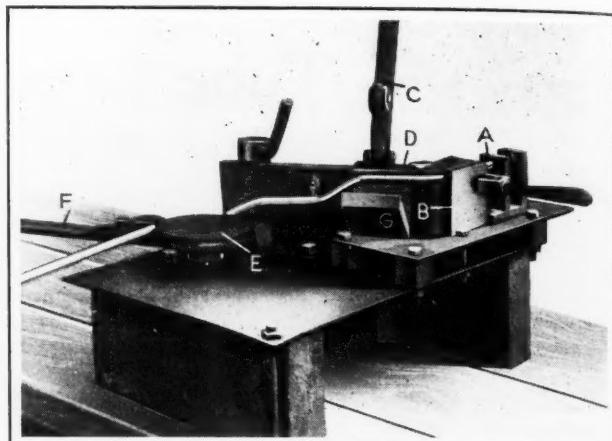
Bending Device Similar to the One at the Right in Fig. 4
